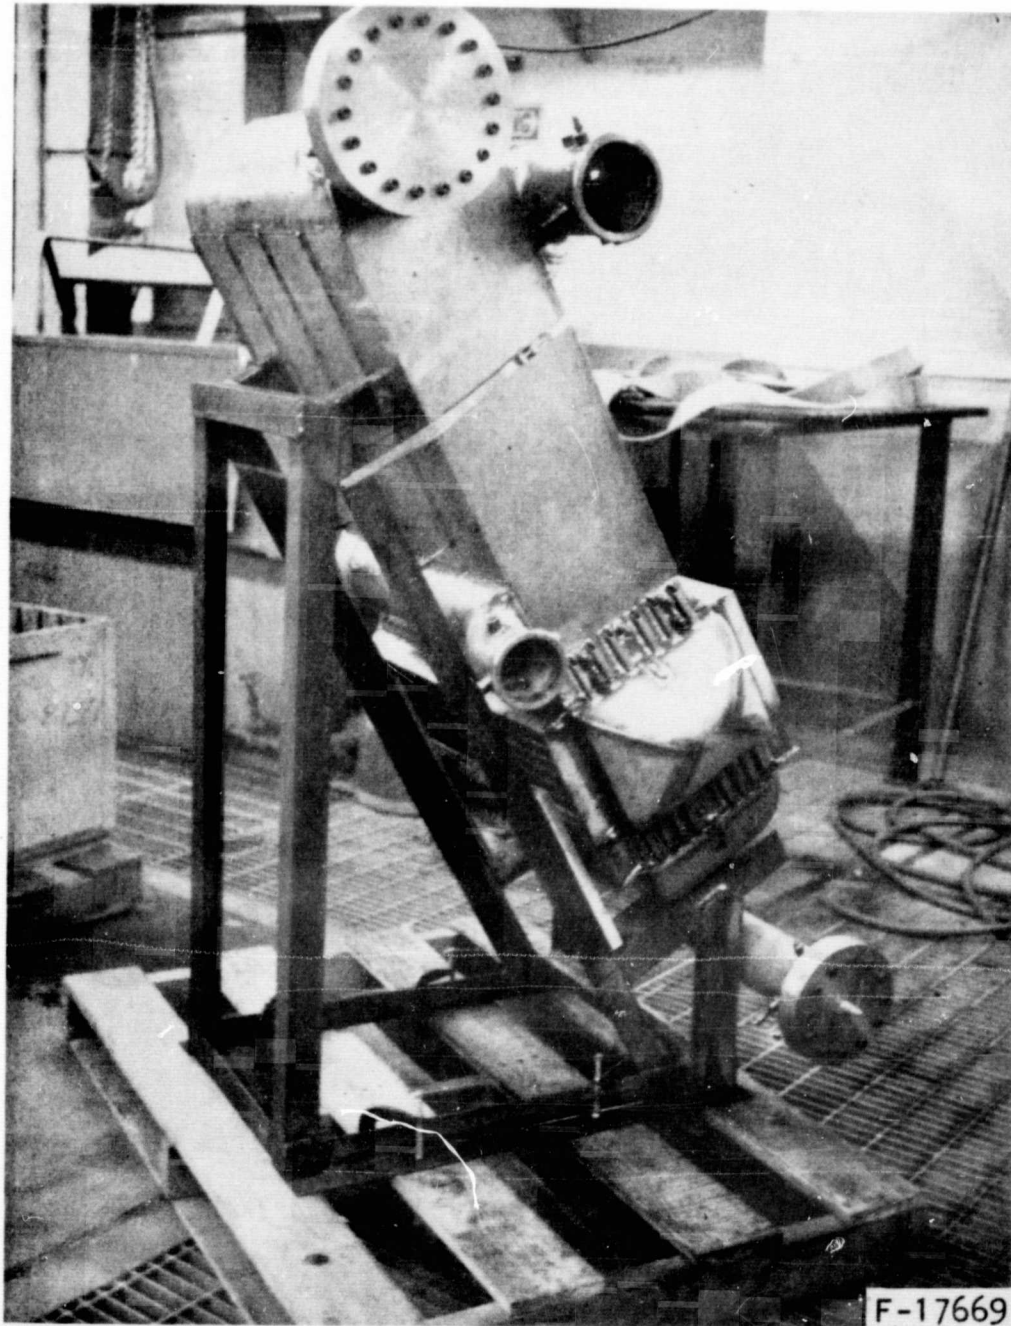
Leak Testing of the BHXU-Alternate Assembly.
